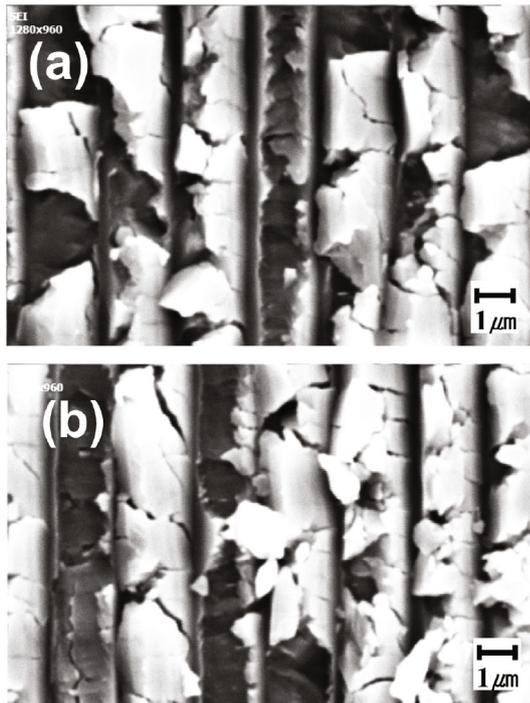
Machined micro pattern with a depth of cut of $1\ \mu\text{m}$ made by using multi-pass machining at (a) the entry area and (b) the middle area.
